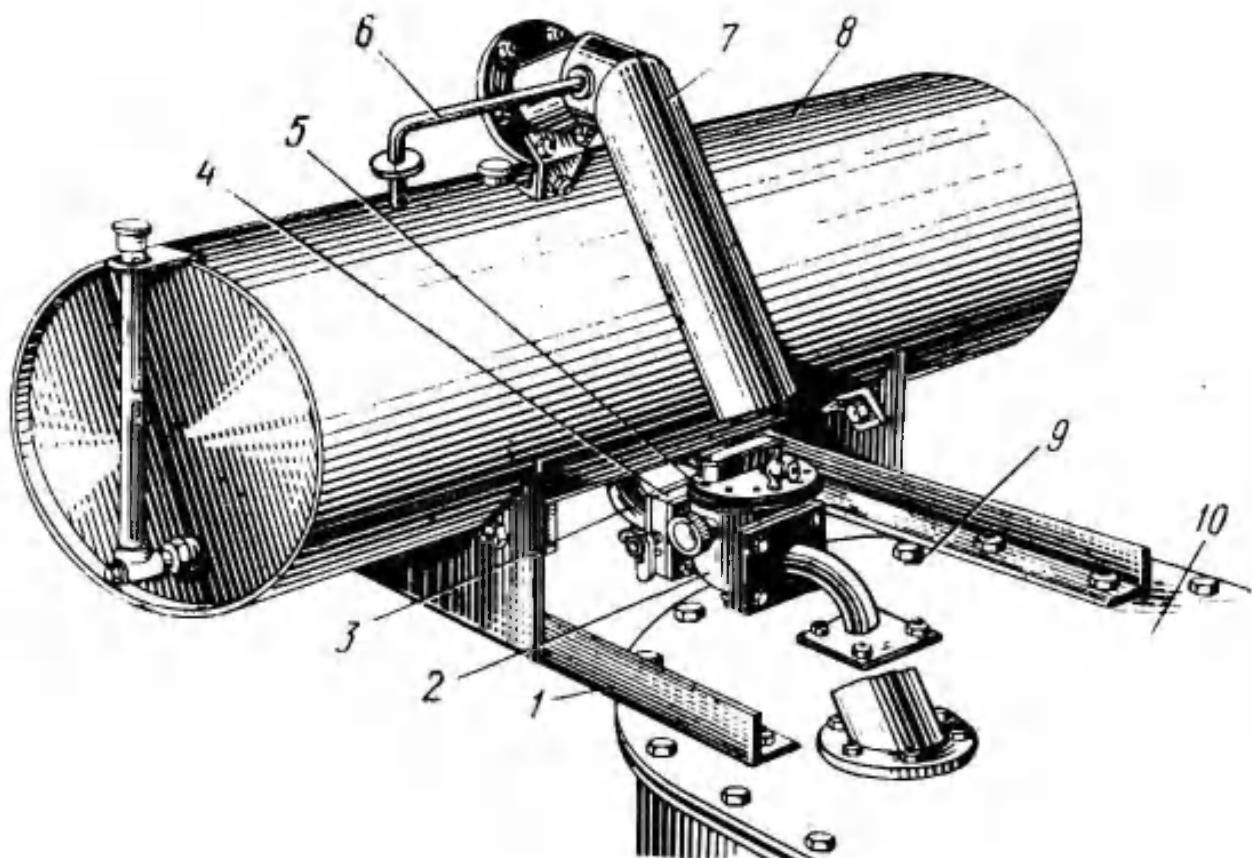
Mounting the oil conservator, Buchholz relay, and explosion-vent tube on a transformer
